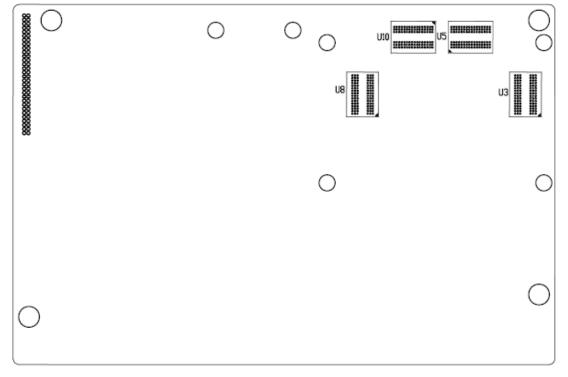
Jumpers and Connectors Location- Board Bottom
